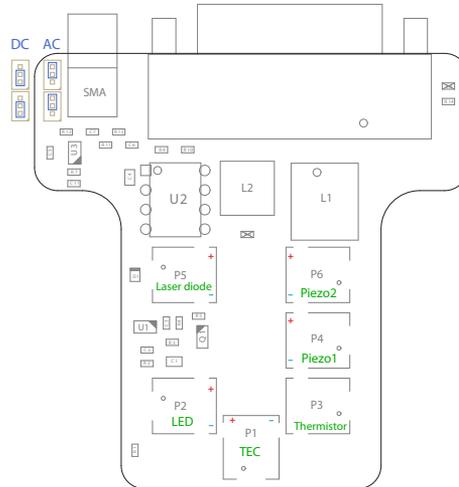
MOGLabs B1045 laser head board showing connectors for laser diode, piezo actuator, temperature sensors, TEC and head enclosure interlock.
